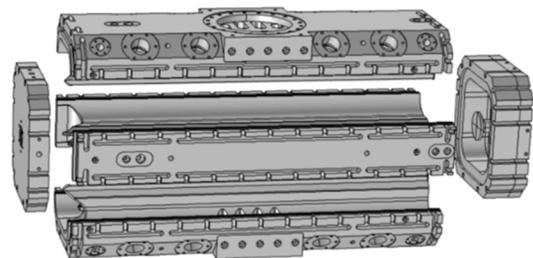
Exploded view of segment 1 with the plunger cover used for RF tests.
